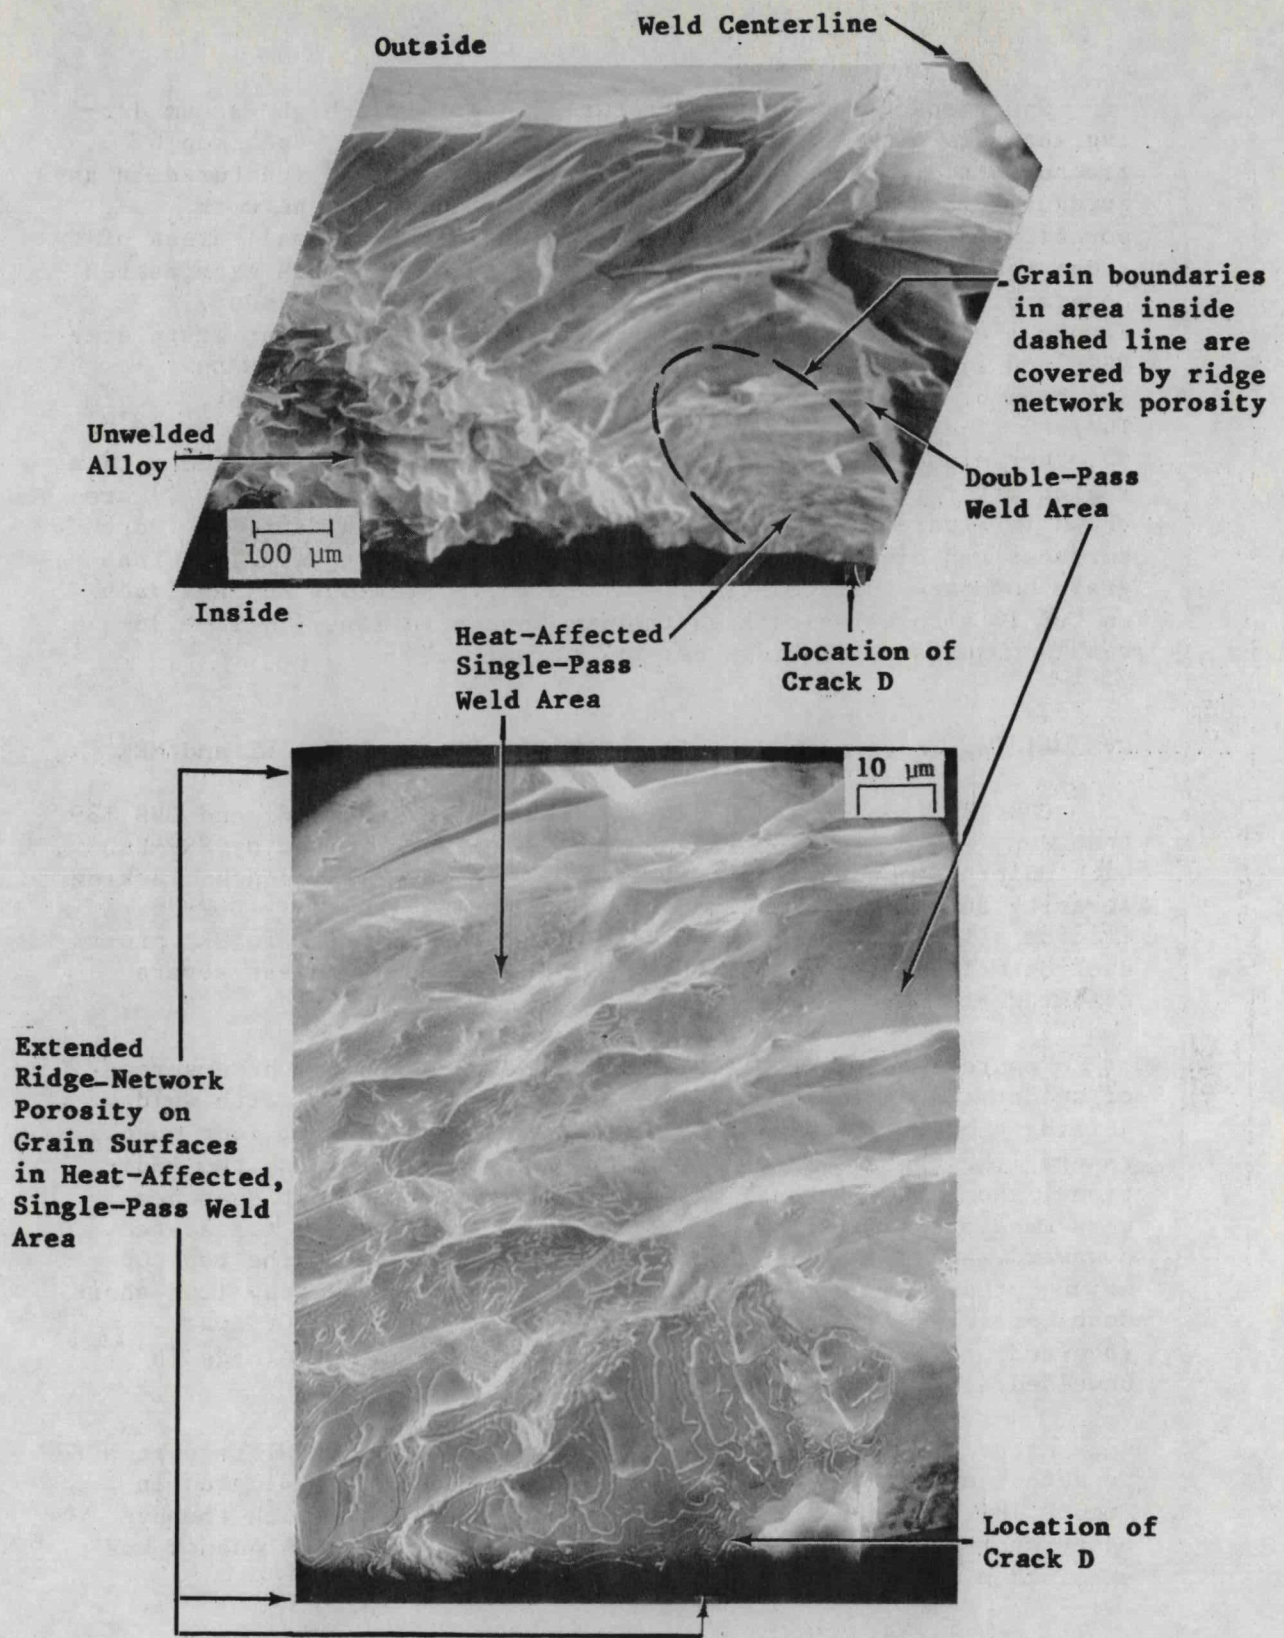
CVS T36 Specimen 8 Fractured Across Weld Along Crack D.
